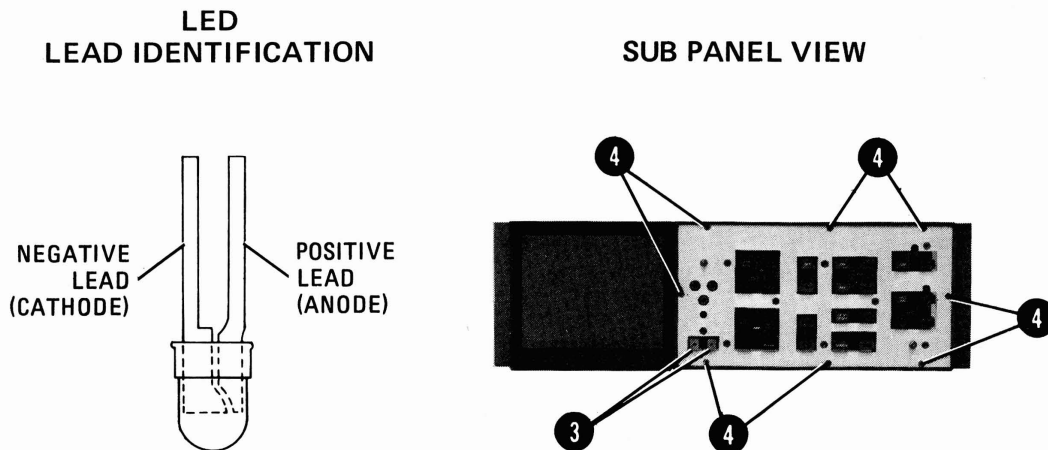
Front-Panel LED Replacement (2 of 2)
